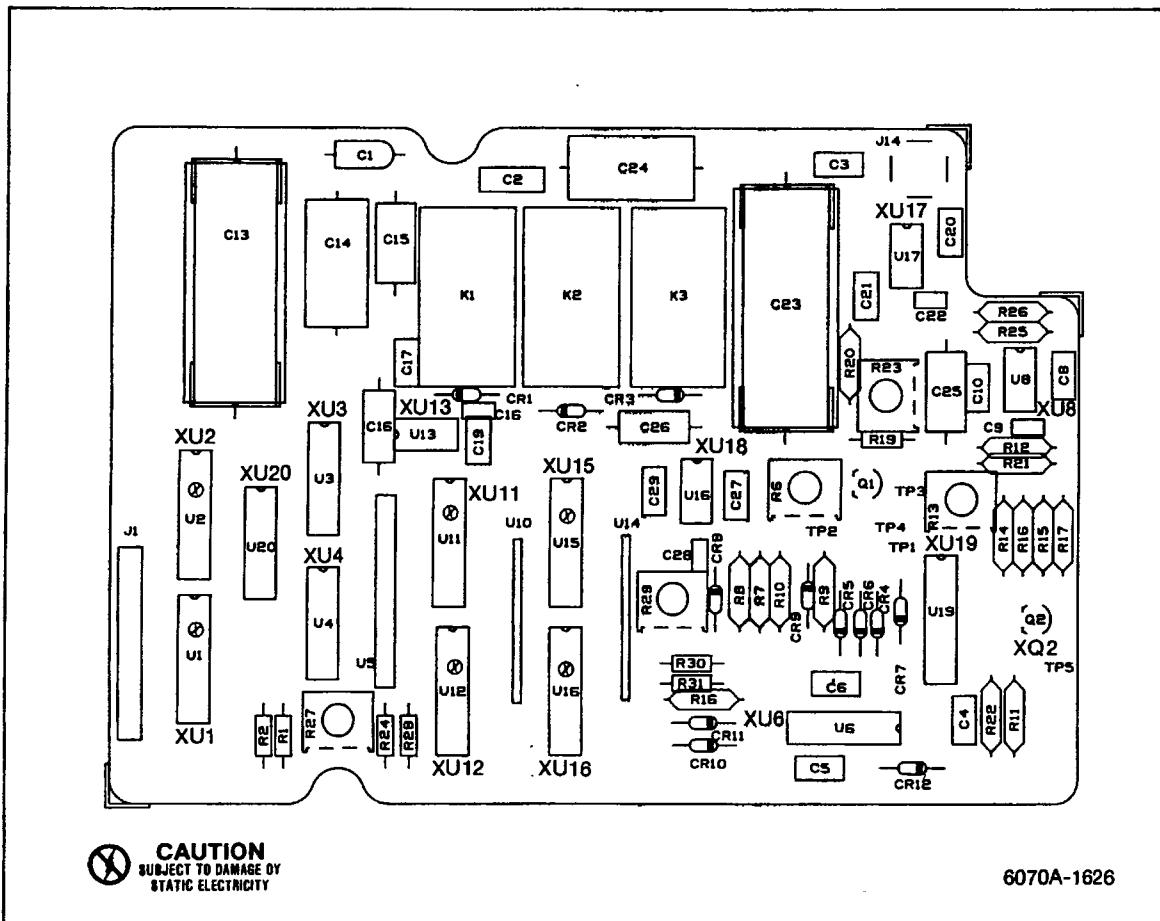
A4A2 Modulation Oscillator PCB Assembly
